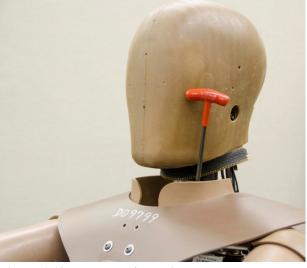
Removal of anterior bolts that attach the neck to the torso
